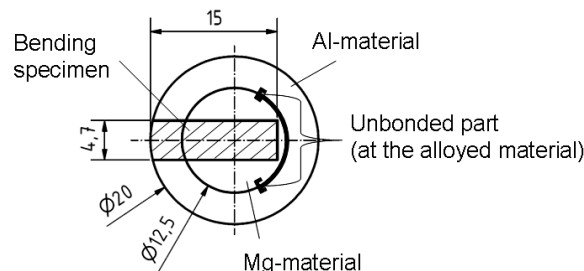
Position of the bending specimen in the cross-section of the co-extrusion rod
